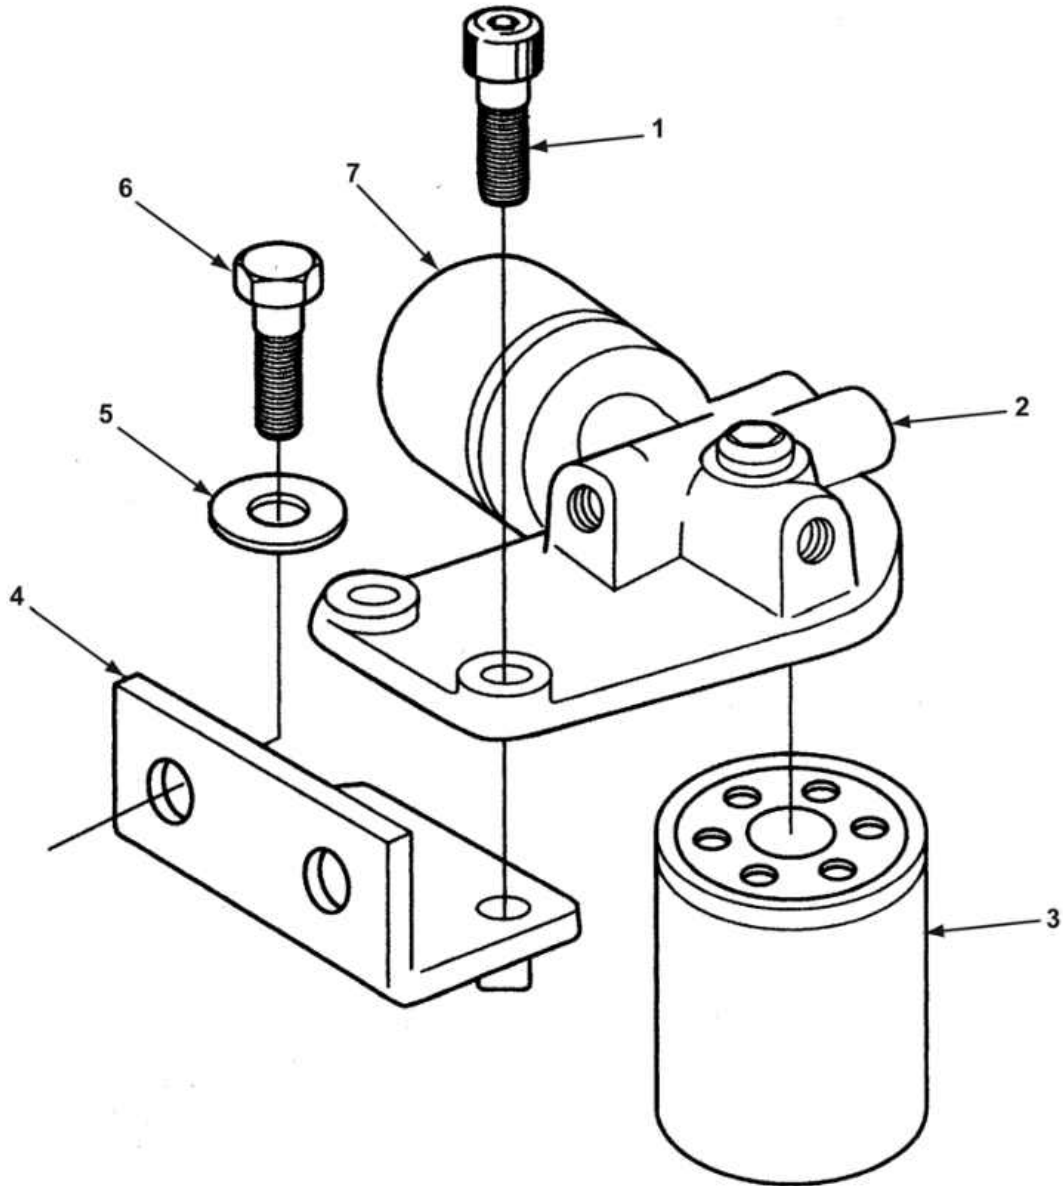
ENGINE FUEL FILTER ASSEMBLY
